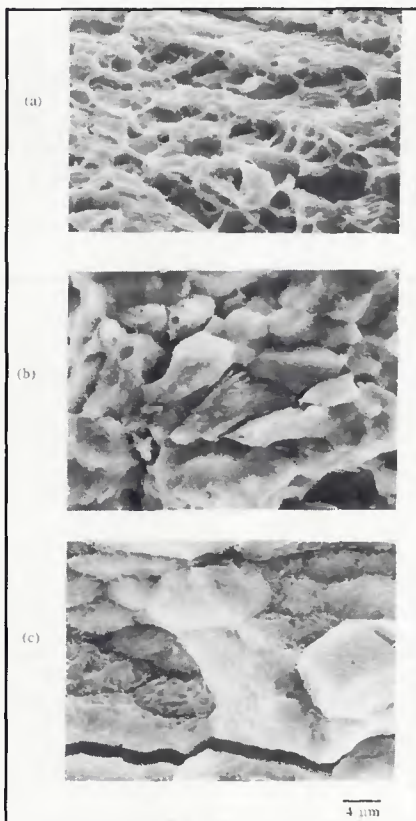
SEM fractographs of EB weldments. A—As-welded condition; B—aged at 160°C for 32 h; C—solution heat treated and aged at 160°C for 16 h
